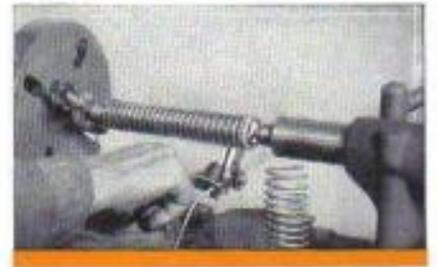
Winding a Steel Spring in the Lathe. Attachment makes Springs from wire 0" to 1/4" in diam. Cat. No. 367. "Balun" \$4.00
